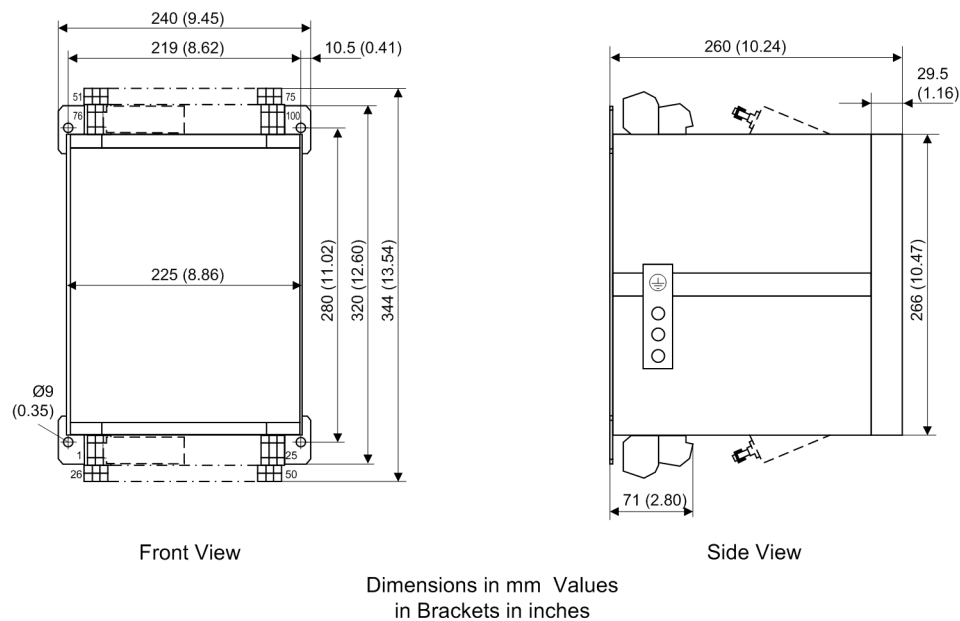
Dimensions of a device for panel surface mounting (size $1/2$)
